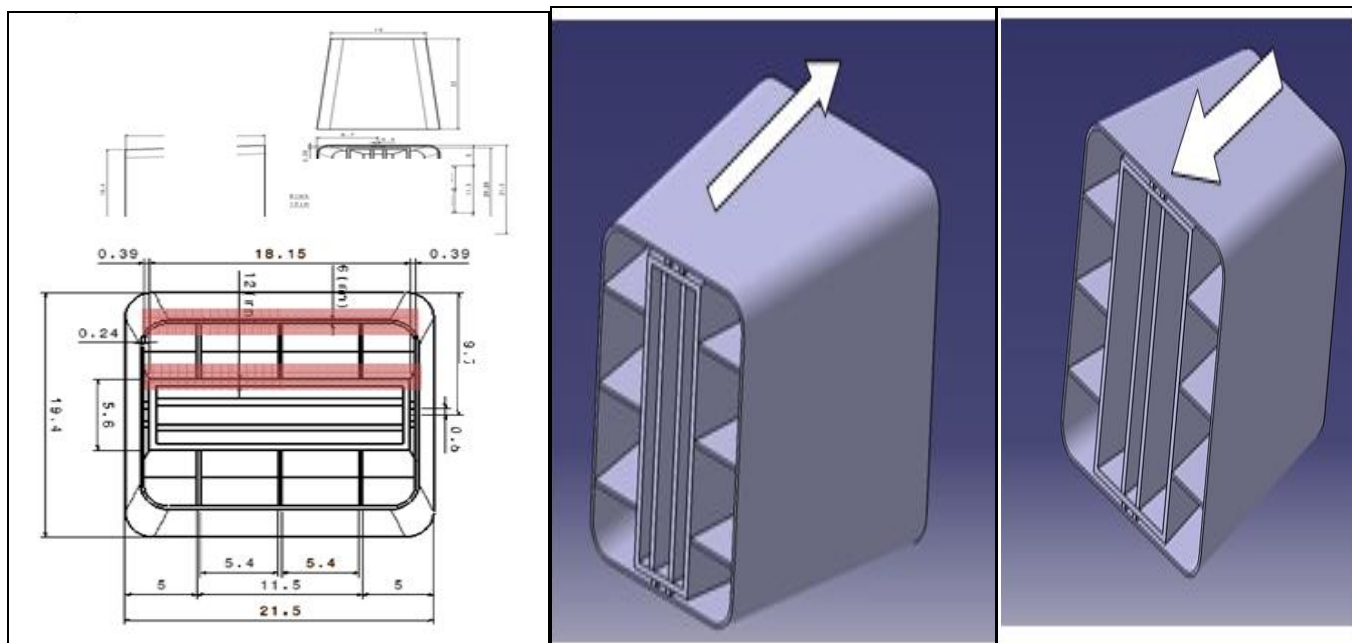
Design of Nozzle Burner (All Dimensions in Inches)
